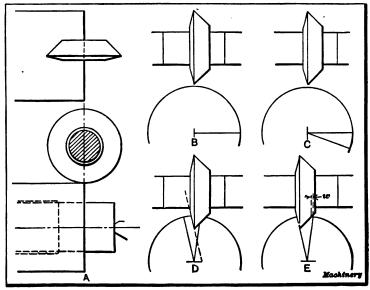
Setting a Double-angle Cutter for Milling Teeth of a Spiral Mill
